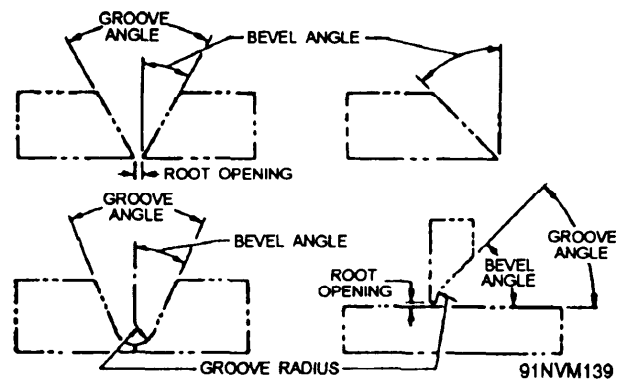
Bevel angle, groove angle, groove radius, and root opening.
